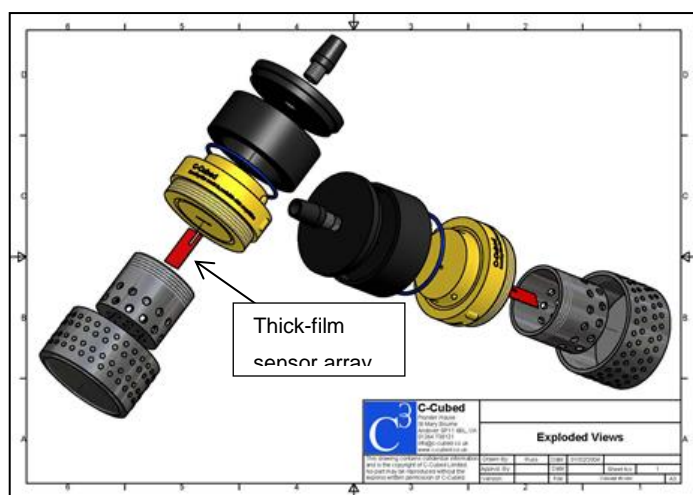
Typical deployment of thick-film sensor array (red) in immersion probe assembly
